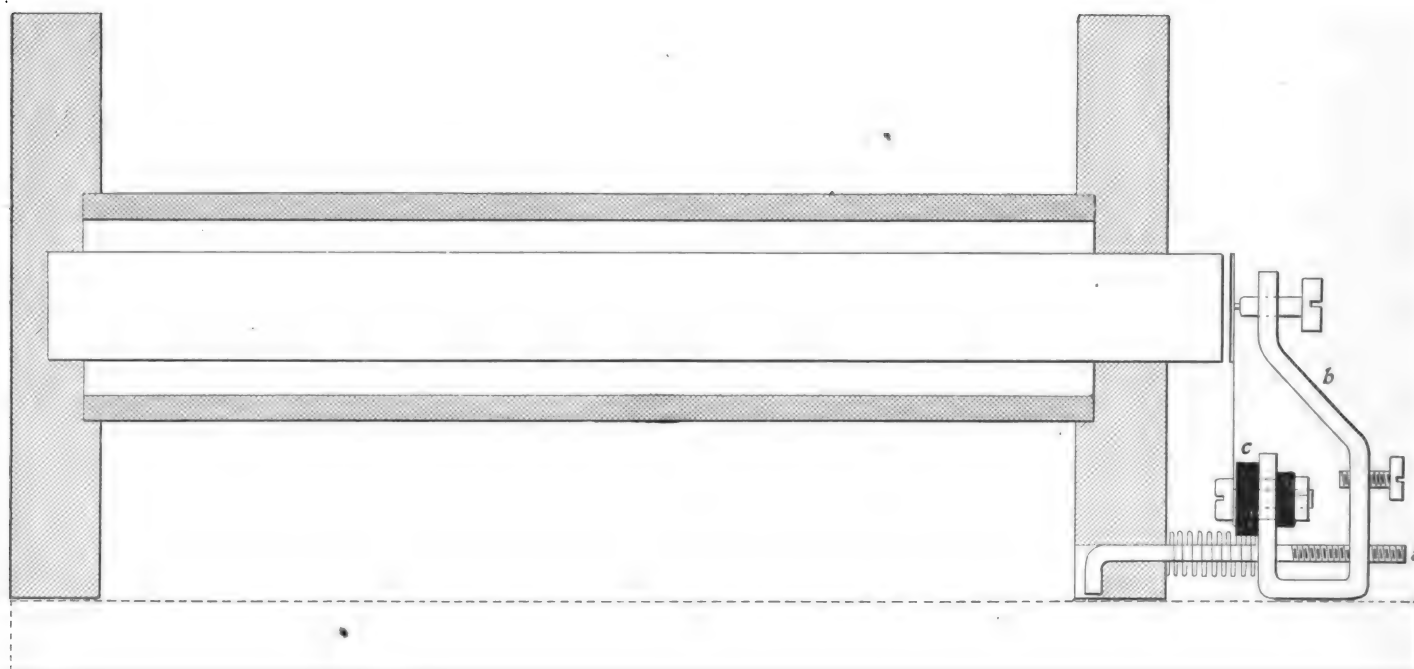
SECTIONAL ASSEMBLY DRAWING OF JUMP SPARK COIL.
